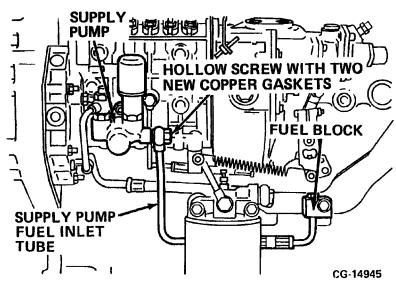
Install the Supply Pump Fuel Inlet Tube Assembly
